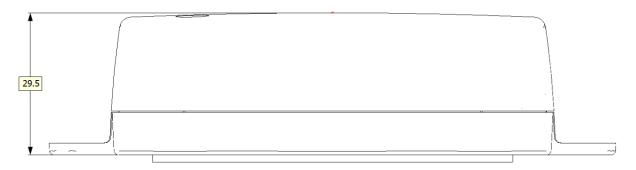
Modbus Thermocouple Sensor Adapter Dimension - Side View
